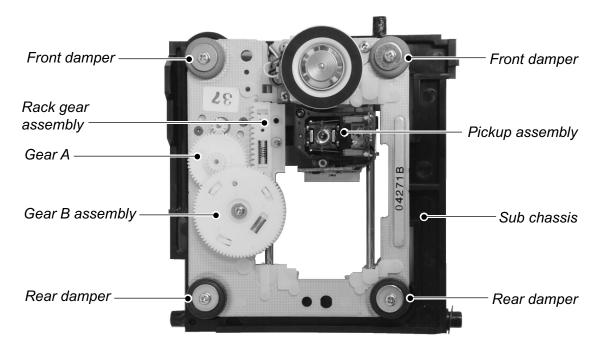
Pickup mechanism chassis assembly (Top side)
